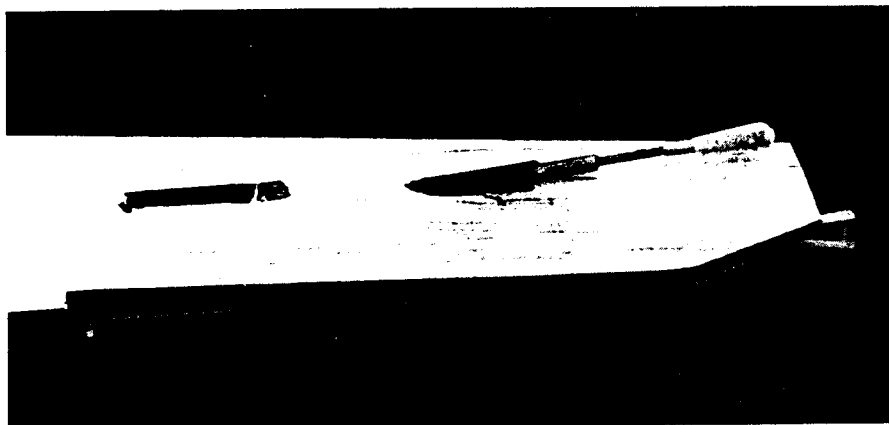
Oops! I cut the first set of pushrod holes in the wrong places. Makes me glad I did a preliminary radio installation.
